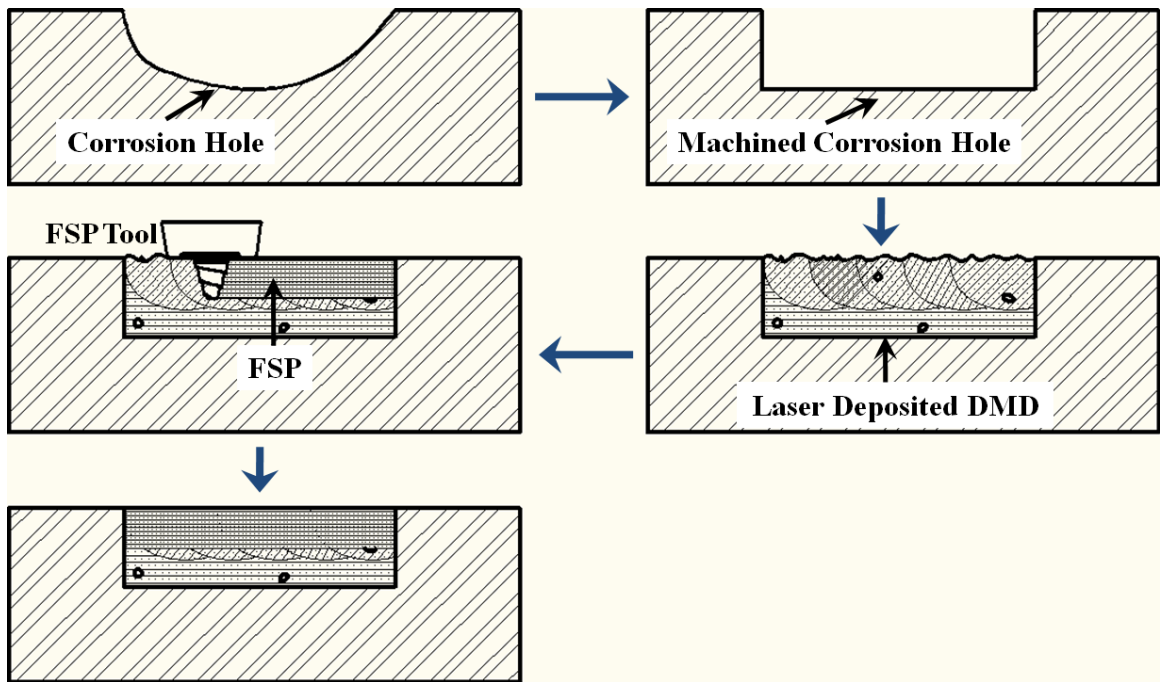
Methodology of repair of Cu-Ni 70/30 using DMD and FSP. First the corrosion hole is machined to a regular shape. This is followed by laser deposition and FSP. The surface is finally machined to desired finish.
